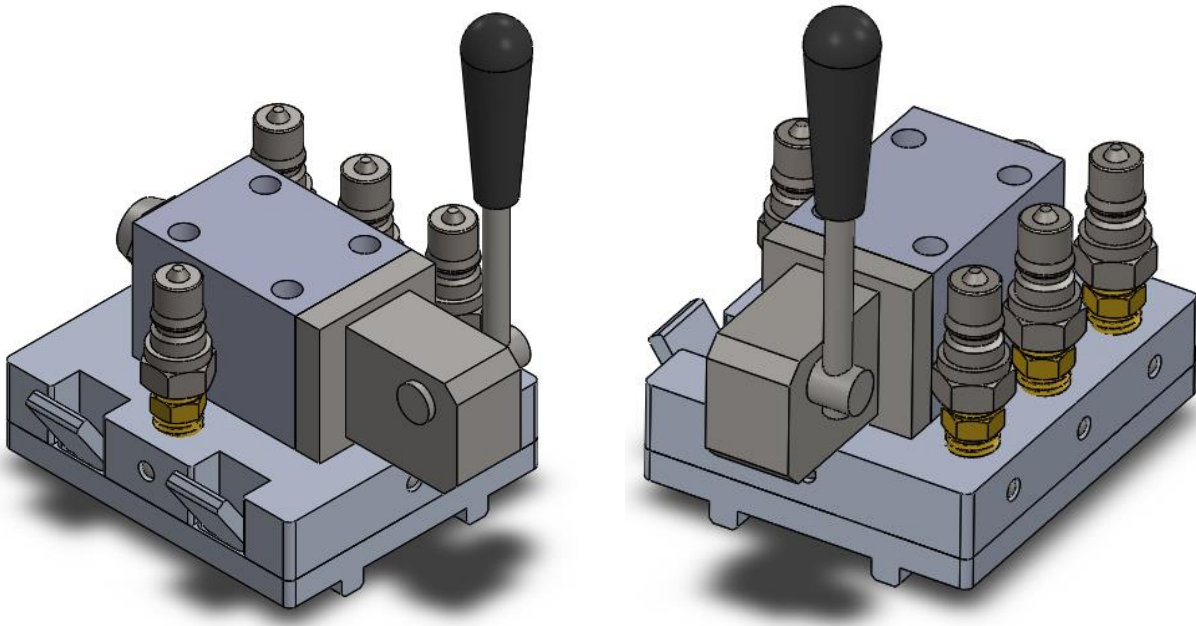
Shows a manual directional valve placed on the sub- and mounting plate assembly.
